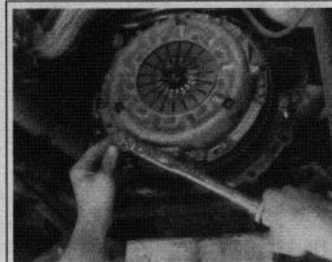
Pressure plate-to-flywheel bolt holes should align
